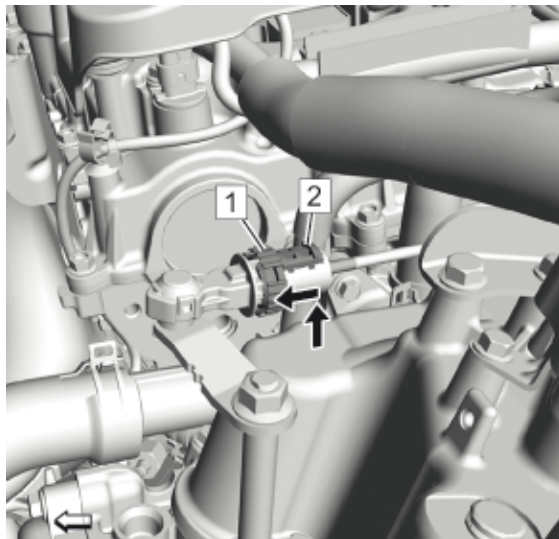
Retaining Collar And Range Select Cable Adjuster Clip
